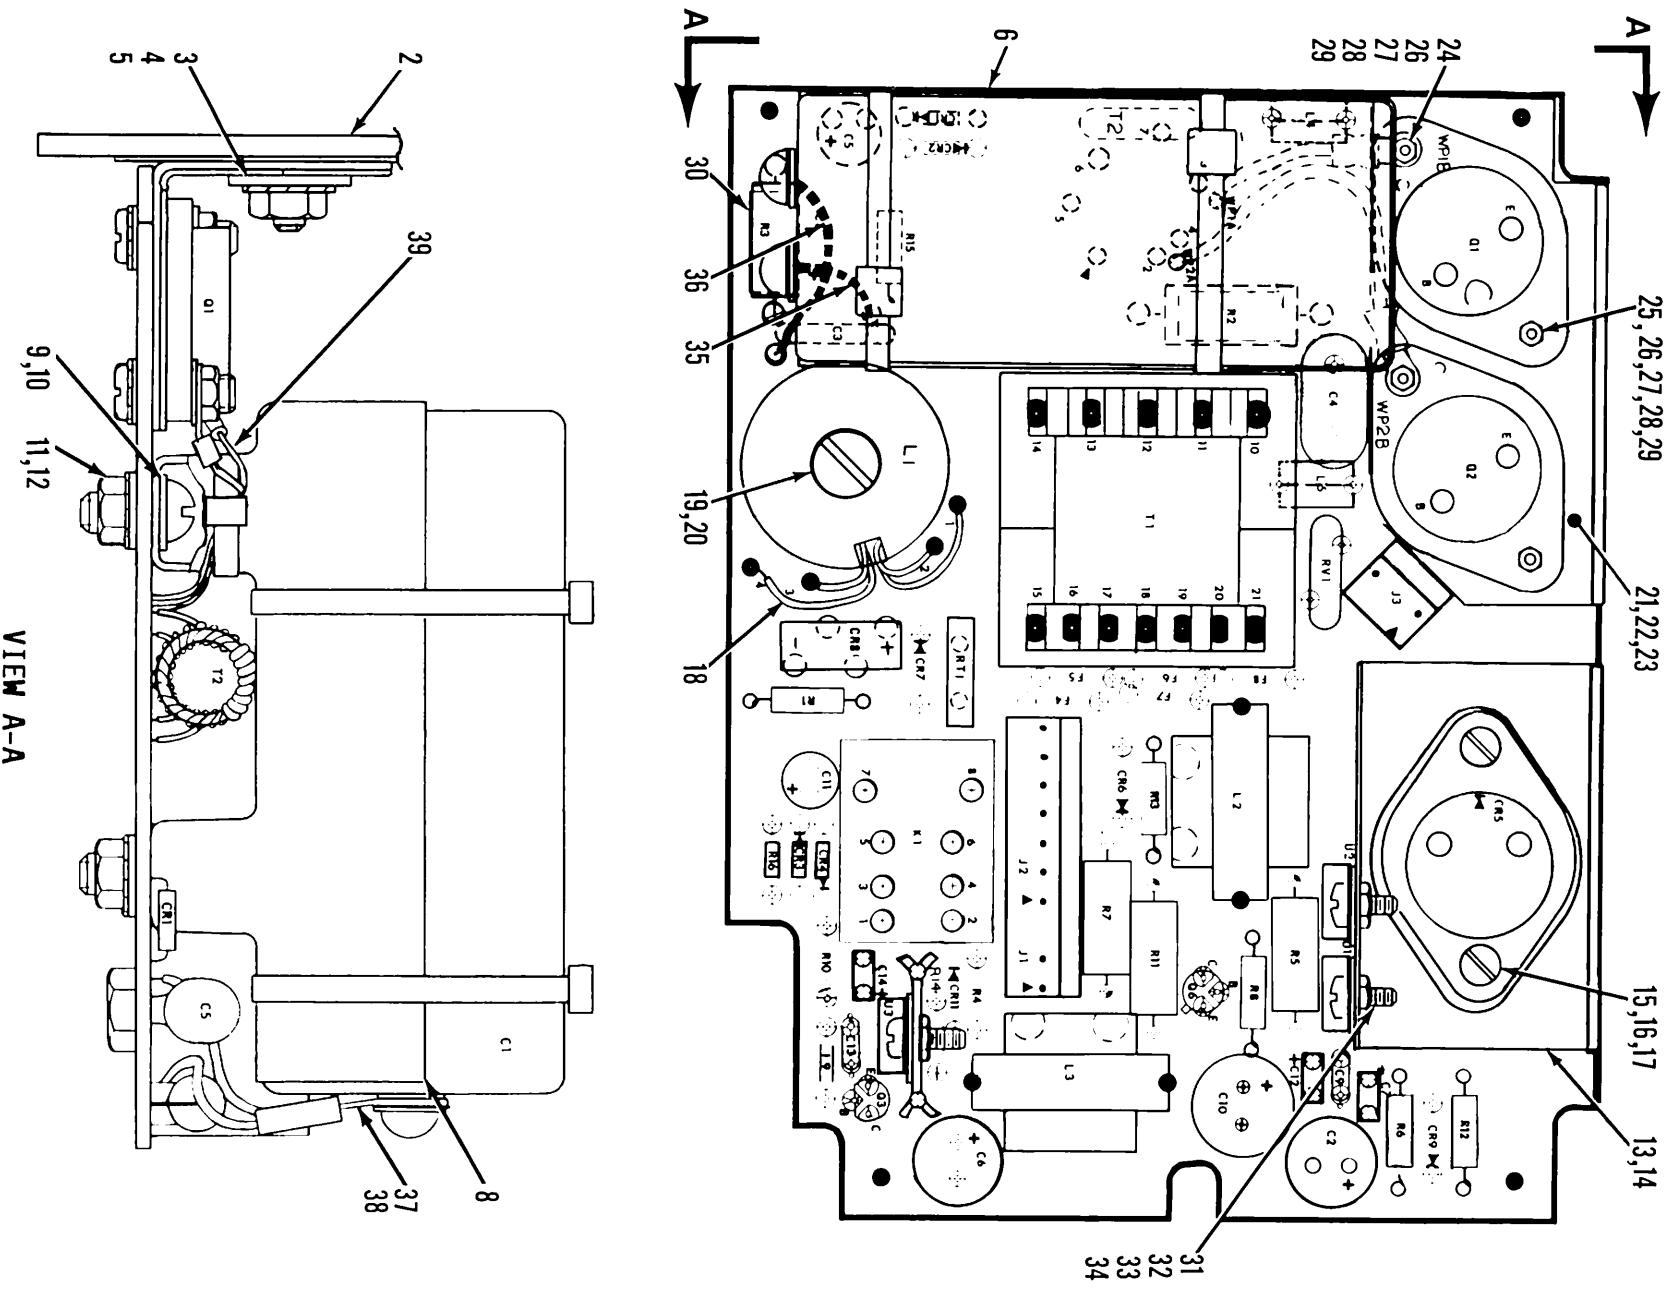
B. CHARGER ASSEMBLY, DEFIB
